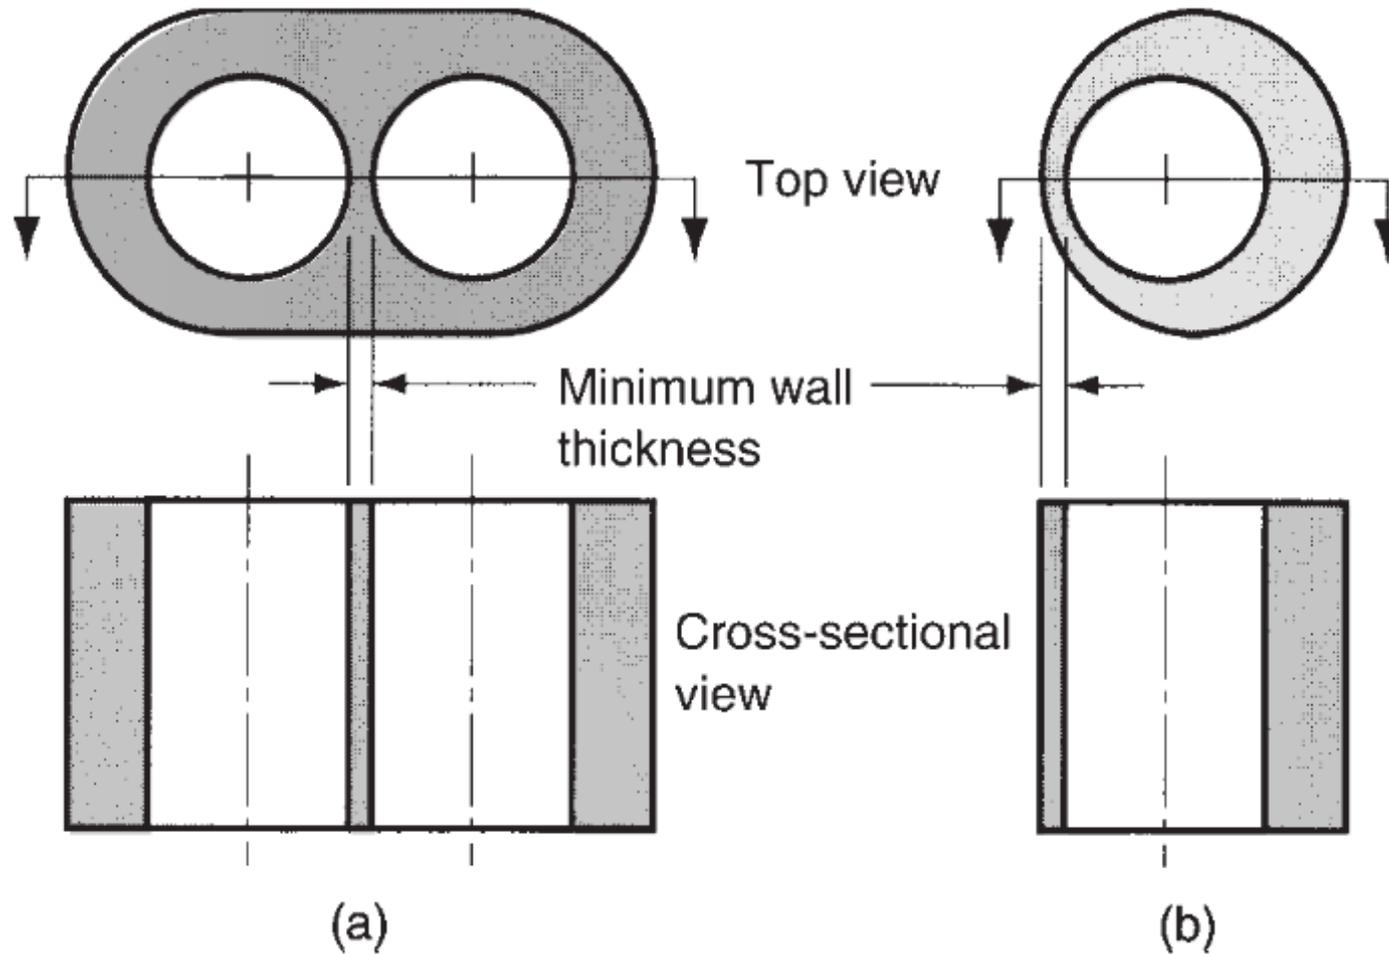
Minimum recommended wall thickness (a) between holes or (b) between a hole and an outside wall should be 1.5 mm.
